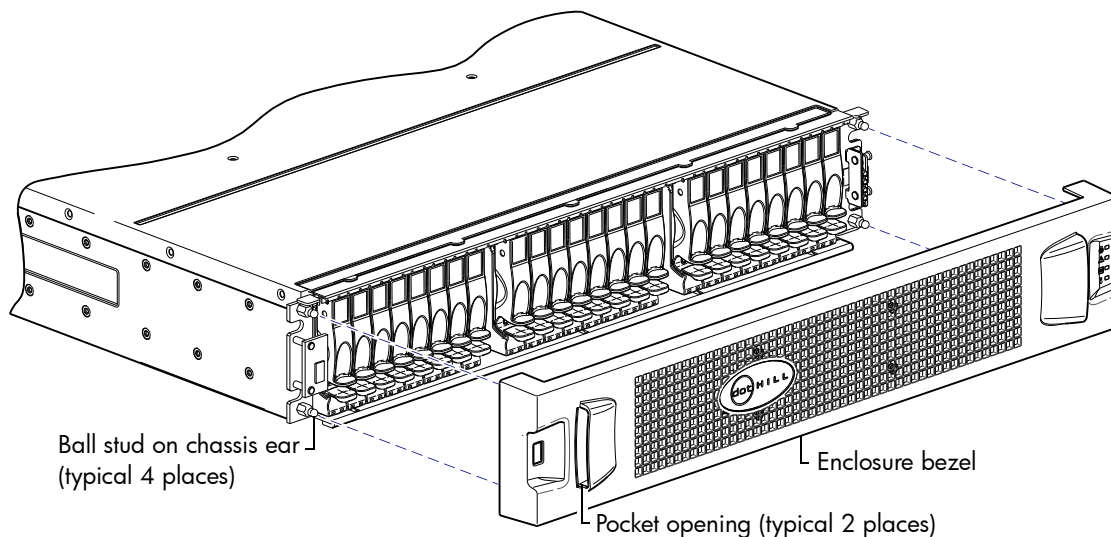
Partial assembly showing bezel alignment with 2U24 chassis
